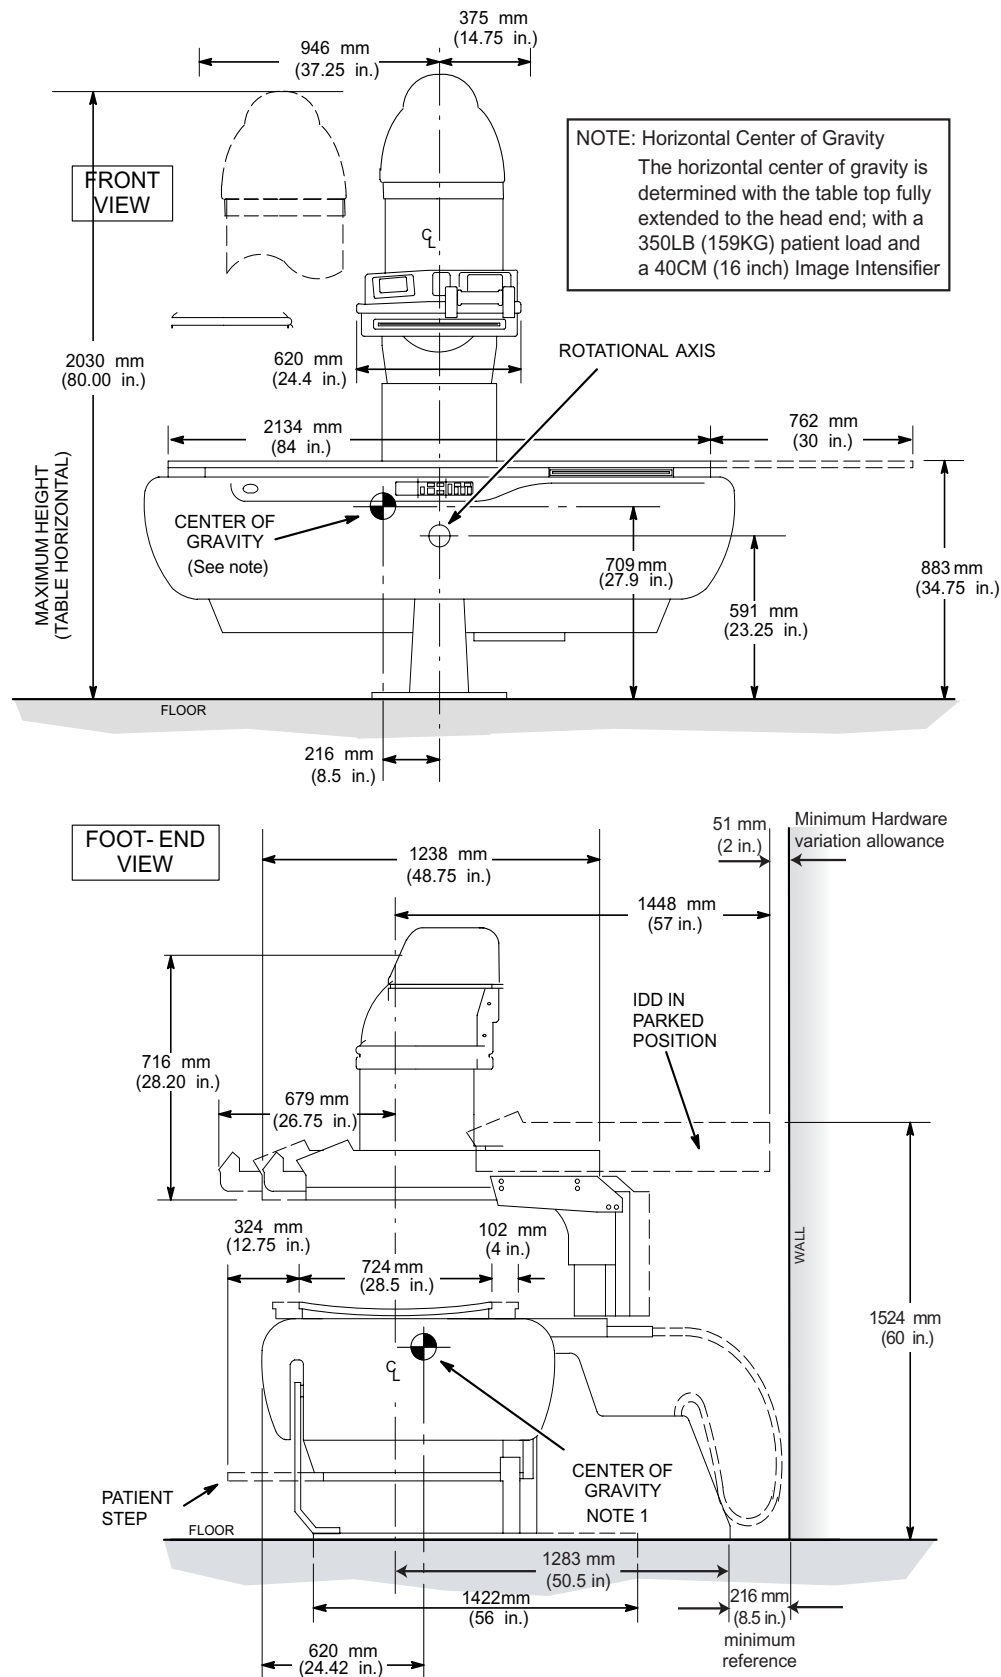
Table Dimensions (Front View and Foot-end View)
